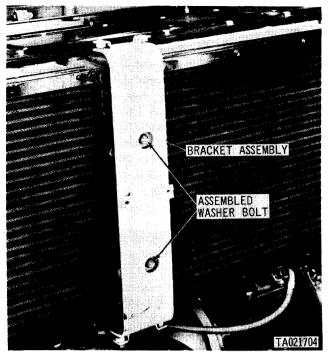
Removing or installing generator cable and wiring harness bracket.
